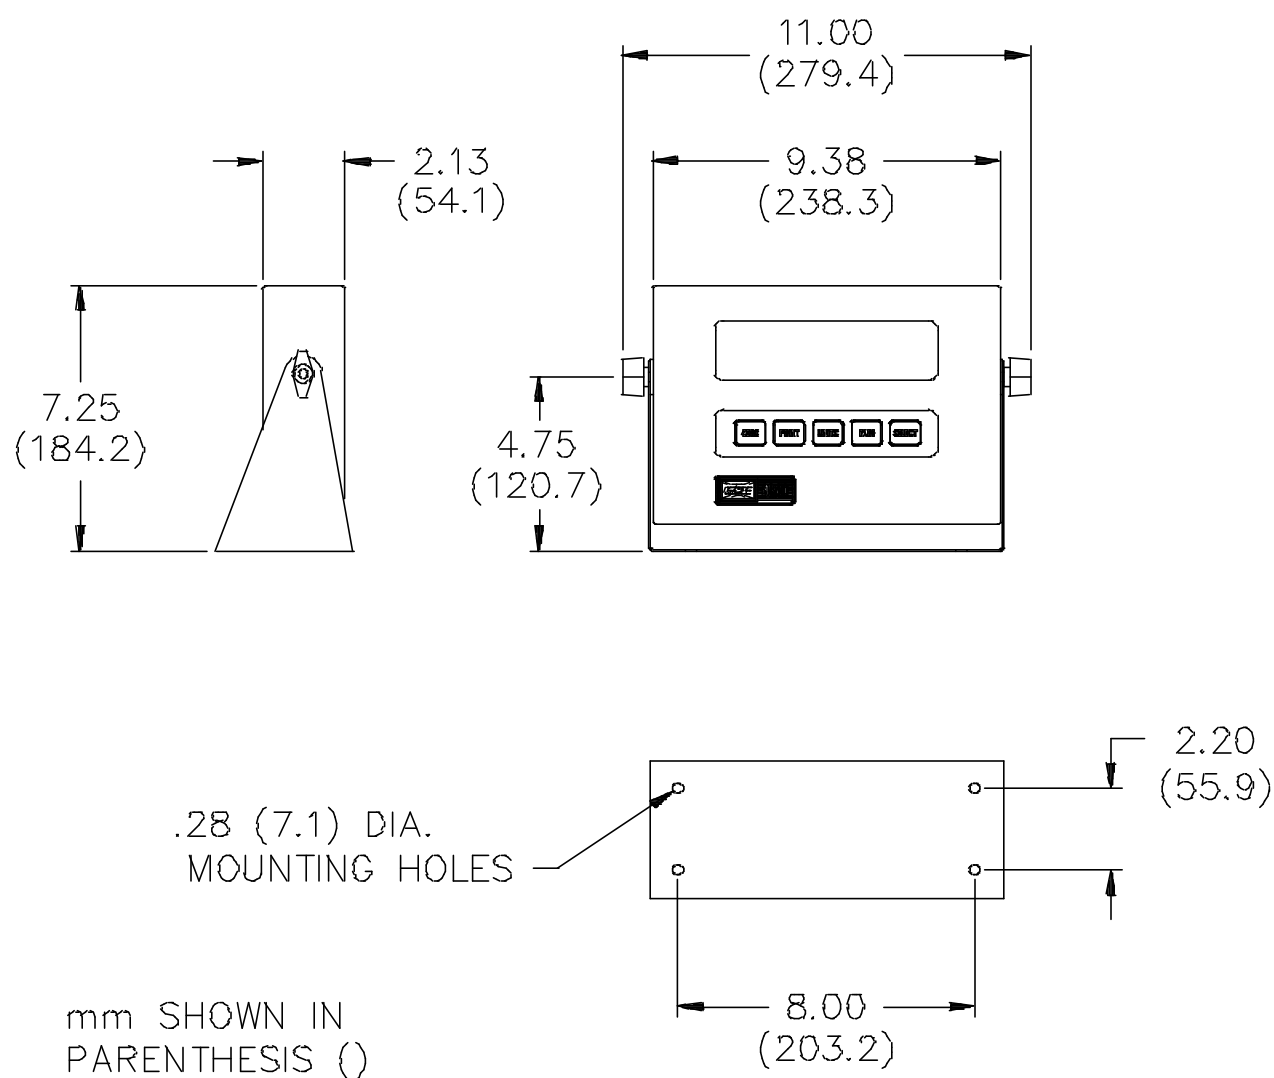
Model 450 indicator mounting holes and overall dimensions
